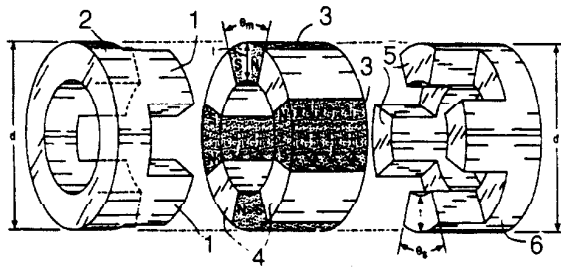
Axial flux PM machine. 1,2 stator poles, 3, rotor pole pieces, 4, ferrite magnets, 5,6 stator poles.
